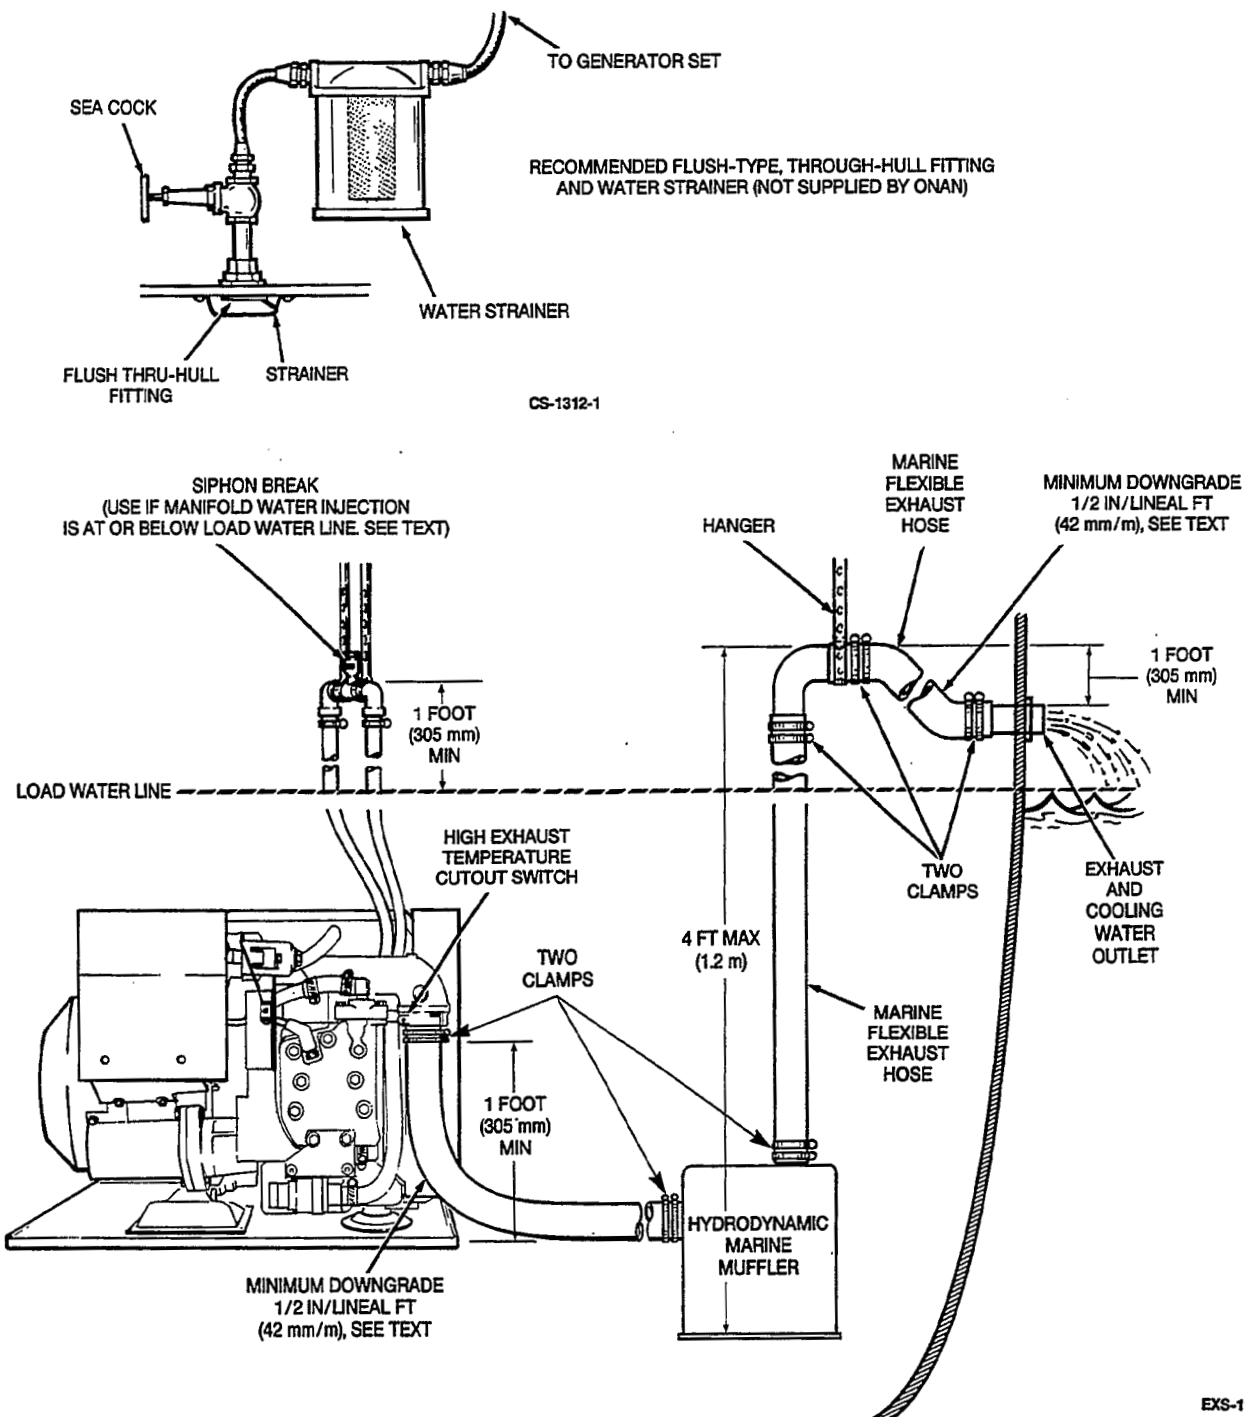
BELOW LOAD WATERLINE INSTALLATION
